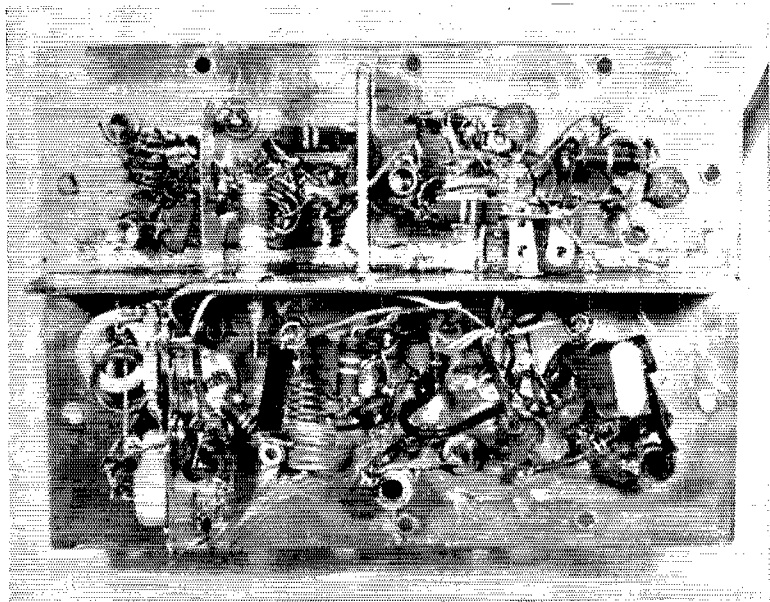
Under-chassis view of the completed transmitting-receiving converter module, showing parts layout and shield partition placement.
